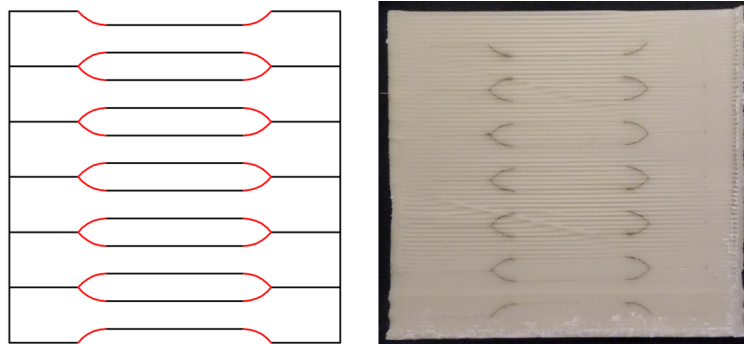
Left: optimized laser cut layout, red lines piercing through the material, black ones penetrating outer layer only, then cut with a paper knife. Right: 300 × 300 mm plate after laser processing.
